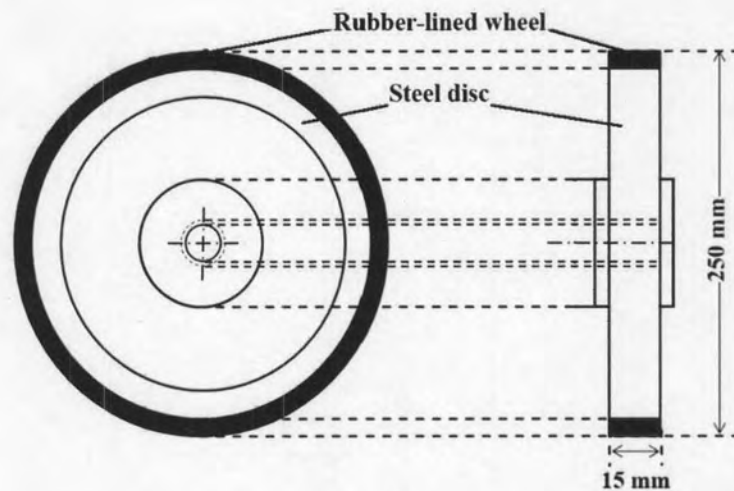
Schematic drawing showing Rubber wheel for Rubber wheel abrasion wear test
